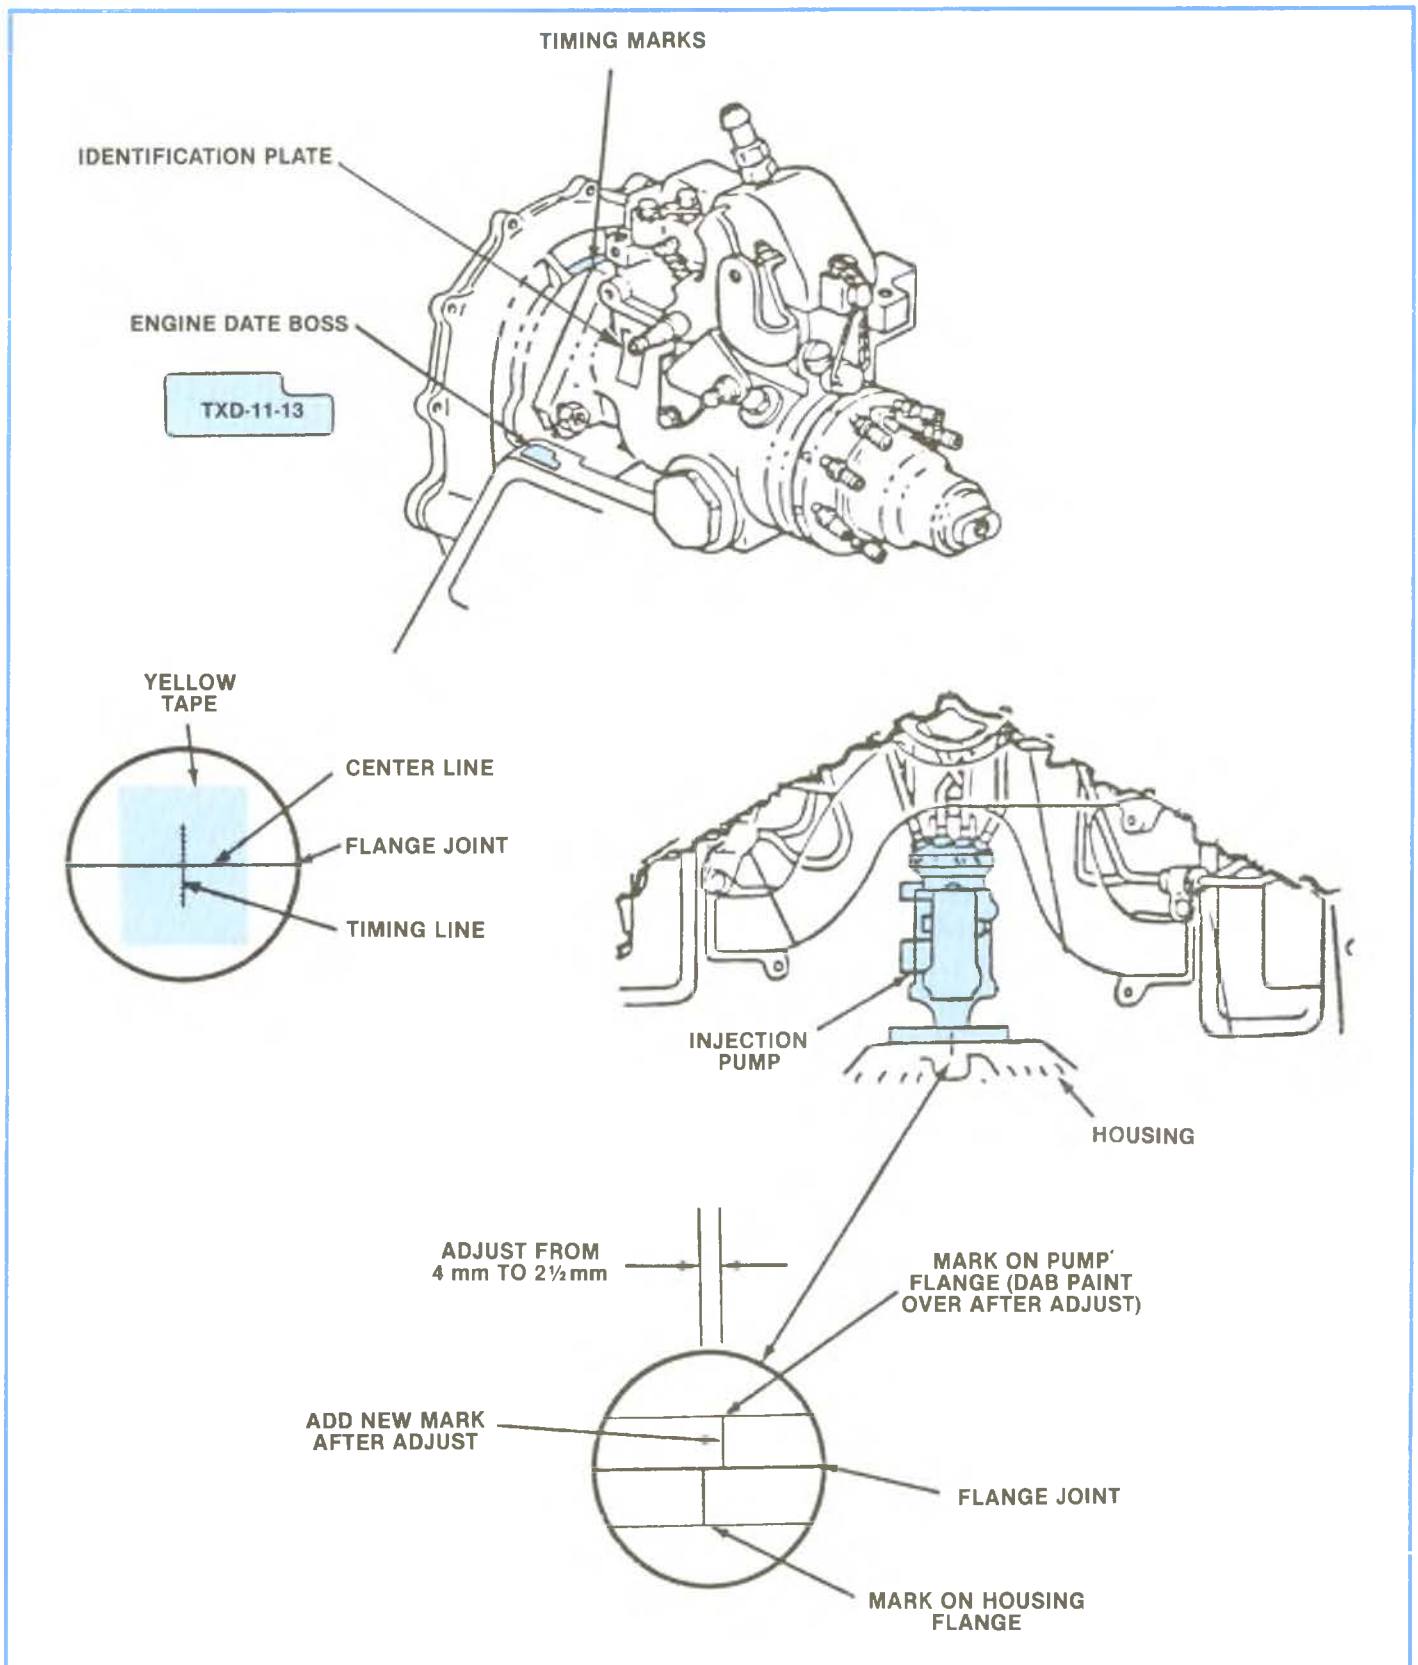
, Timing Adjustment, Heavy Duty 6.2L Diesel Engine.
